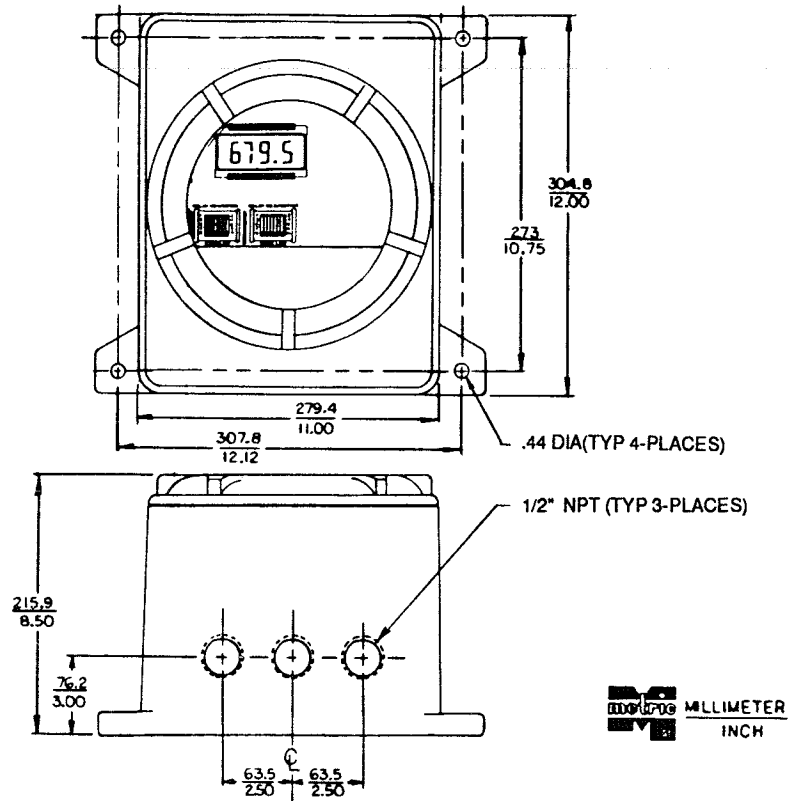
Mounting Dimensions, Display Unit, Explosion-Proof with window.
